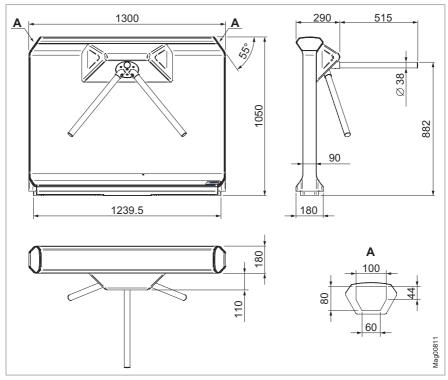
Dimensions FMTP-ML (dimensions in mm)
